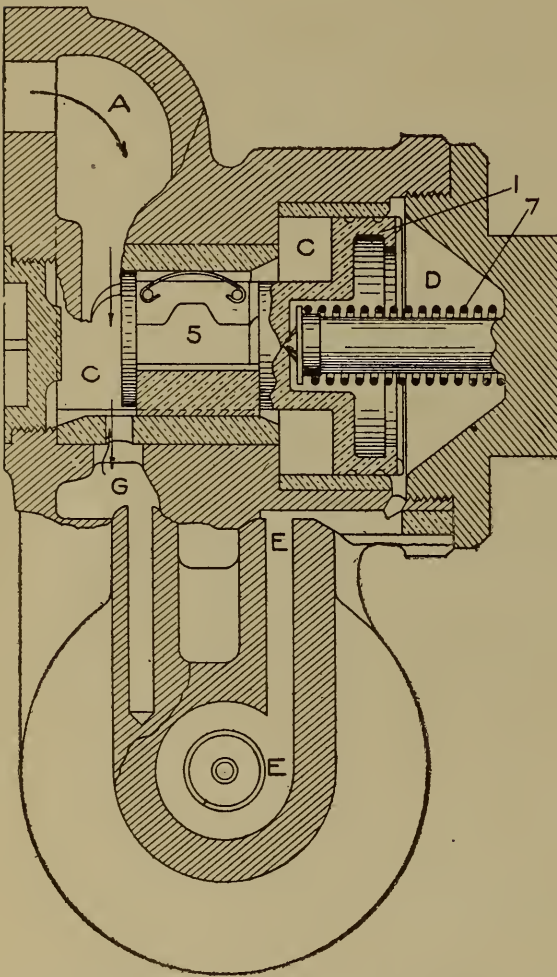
Central Section through Supply-Valve Case and Governing Device of Slide-Valve Feed-Valve.
